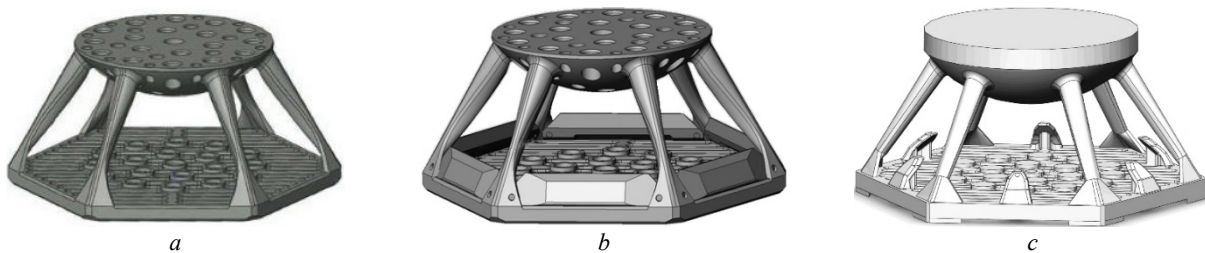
Lower casting machined part of the WFA top nozzle (a) and the modified RWFA (b, c) [11]
